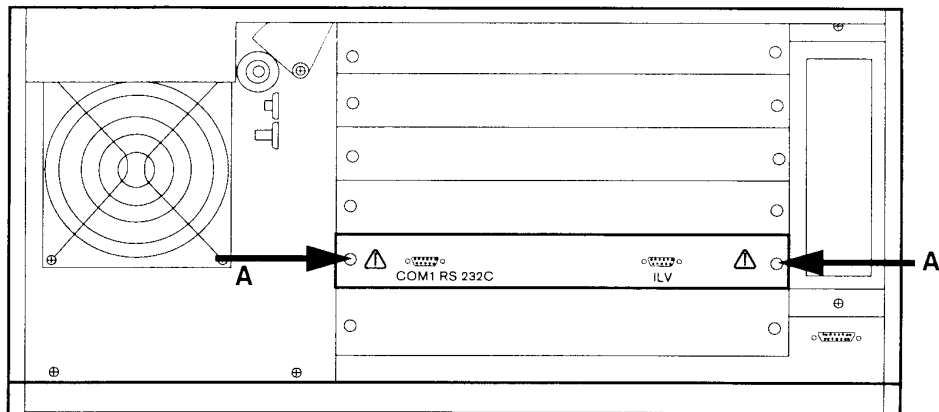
Rear view (dismounting the CPU 68332 PCB)
